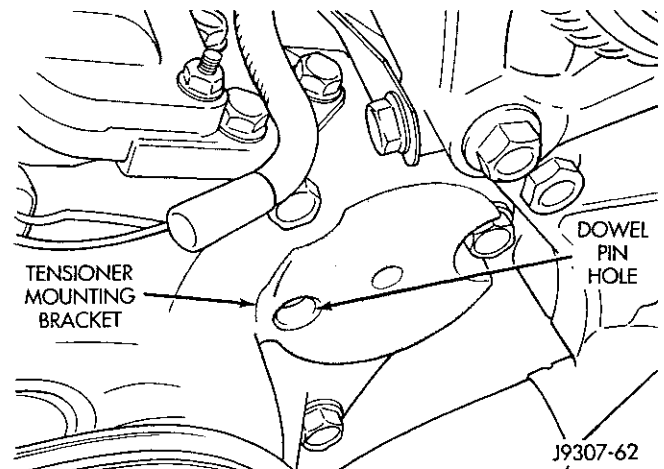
Tensioner Dowel Hole—5.9L HDC-Gas and 8.0L V-10 Engines
